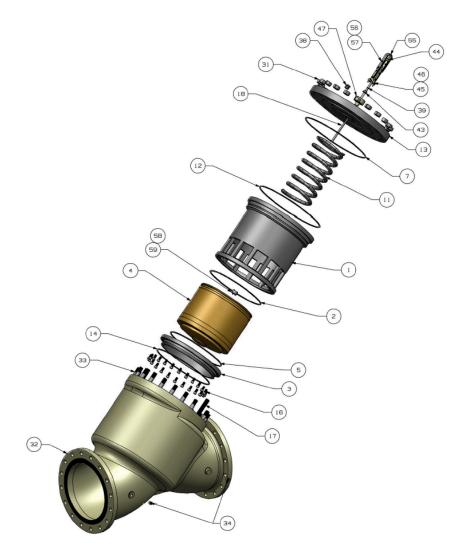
Part identification for an NPS 16 inch Control Valve
